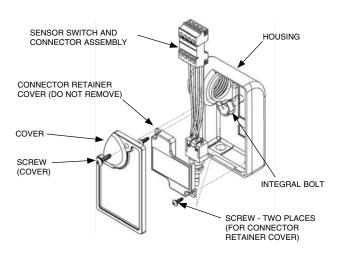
PLACEMENT INDICATOR SWITCH INTERNAL COMPONENTS
